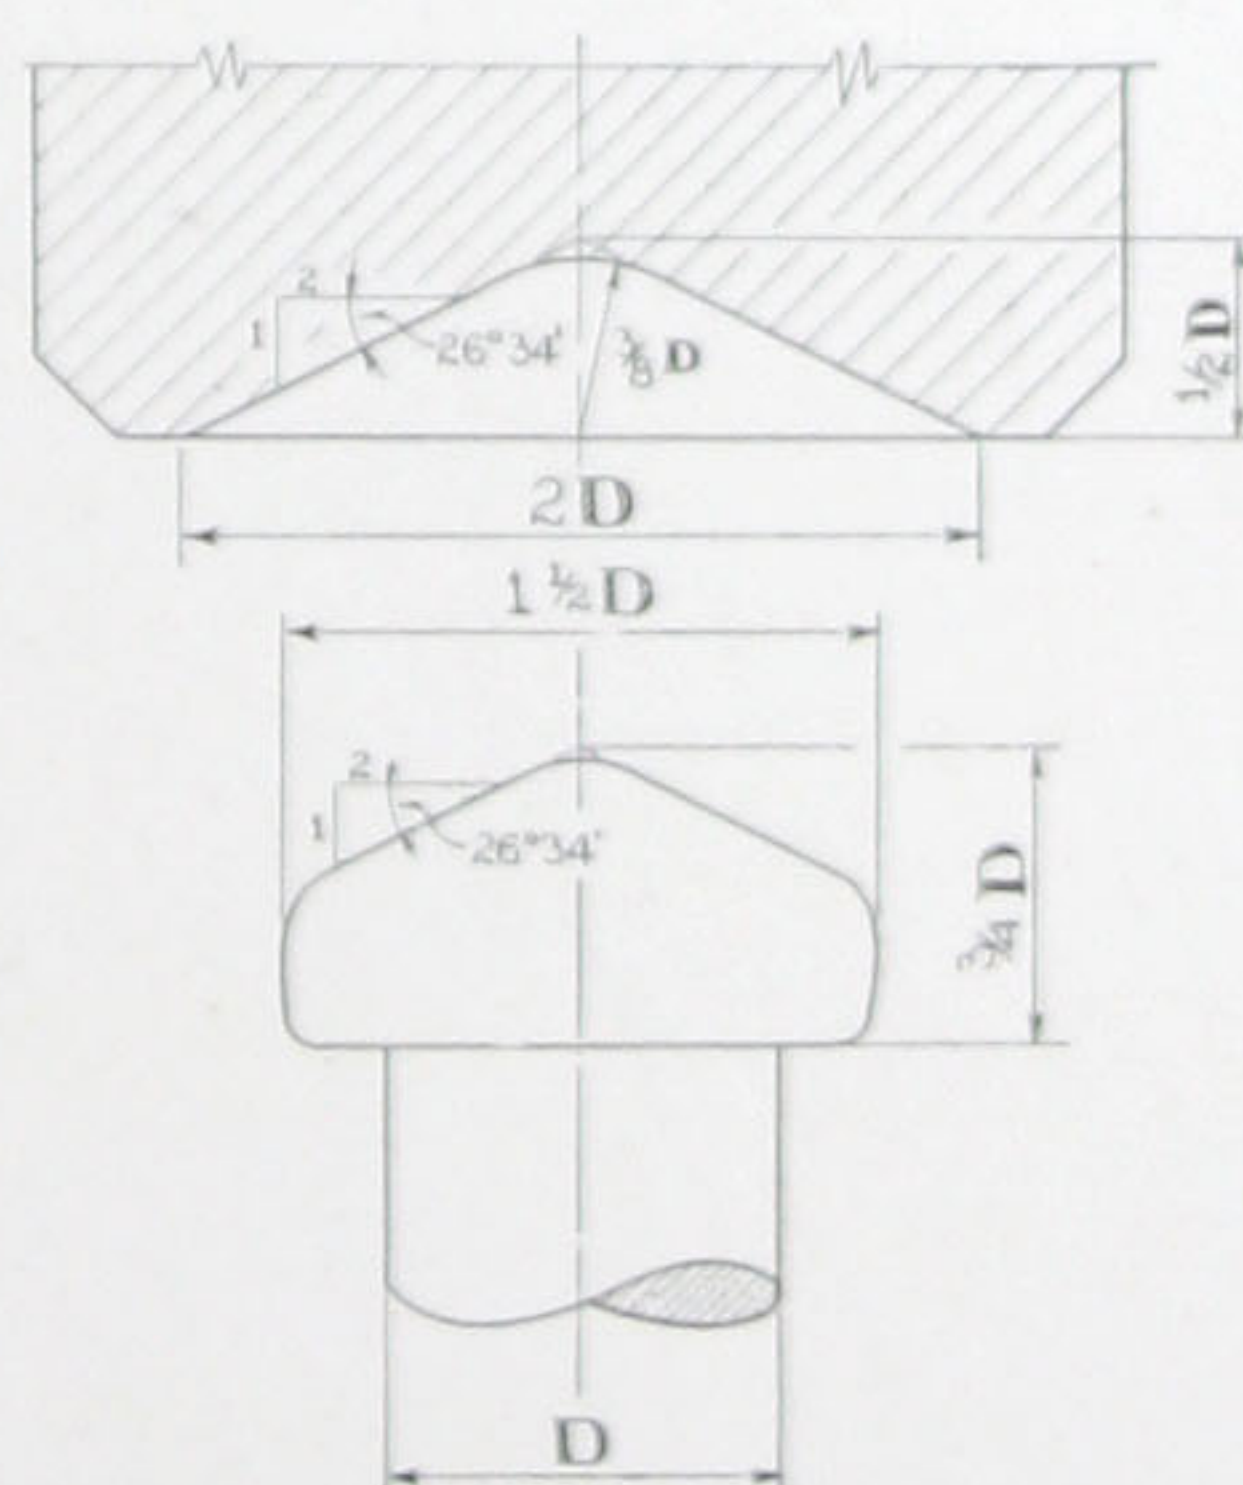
Nominal dimensions of cone-point head and rivet set.
